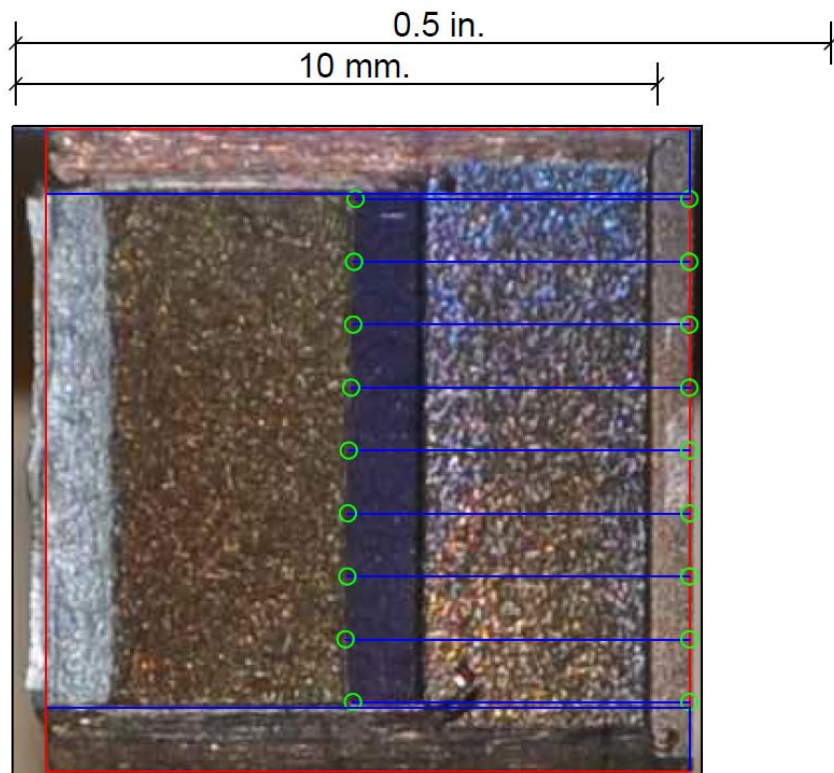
Specimen E32' Fracture Surface
